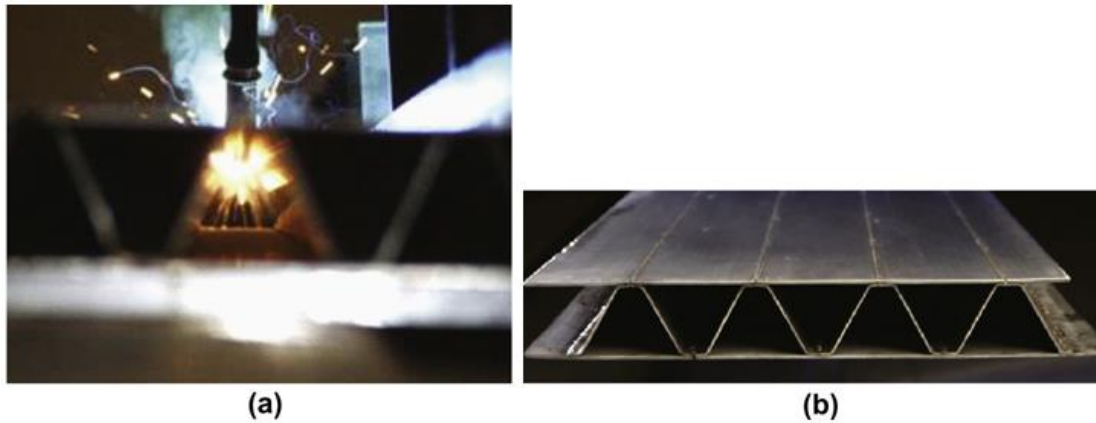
a) Laser stake welding of the core to the face-plate, (b) post production laser welded sandwich panel (Poirier, Vel, & Caccese, 2013)
